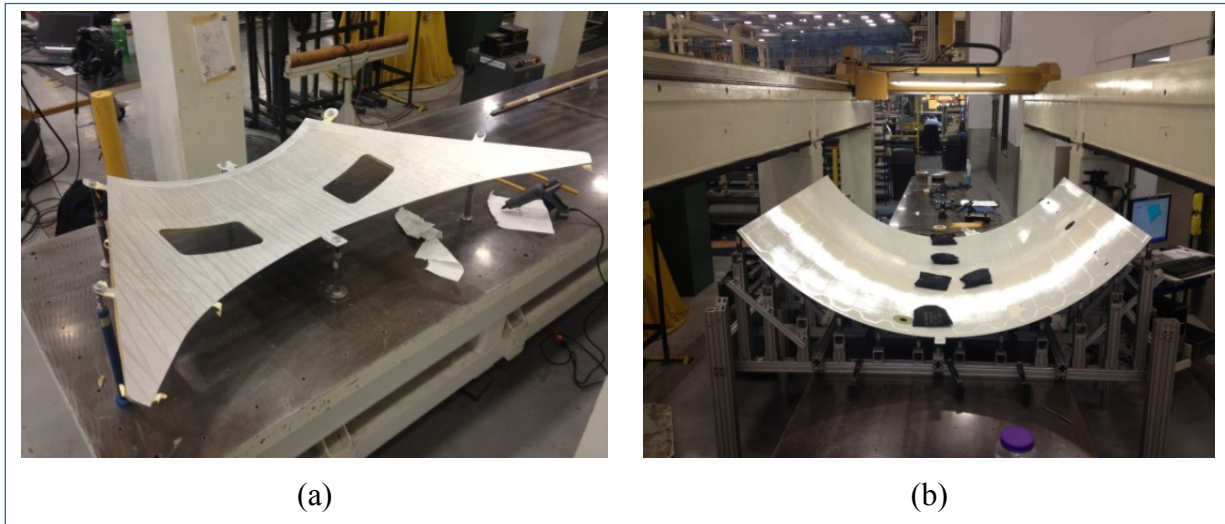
Specialized fixtures for the inspection of aerospace compliant parts – Source: Bombardier Aerospace Inc.
